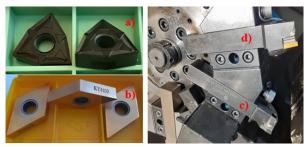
a) Coated carbide and b) ceramic inserts, c) Walter and d) Takımsan tool holders
